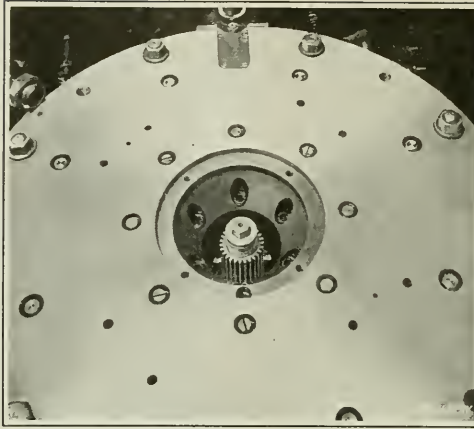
Gear Shaper designed for cutting all of the Teeth in a Stack of Gears simultaneously
